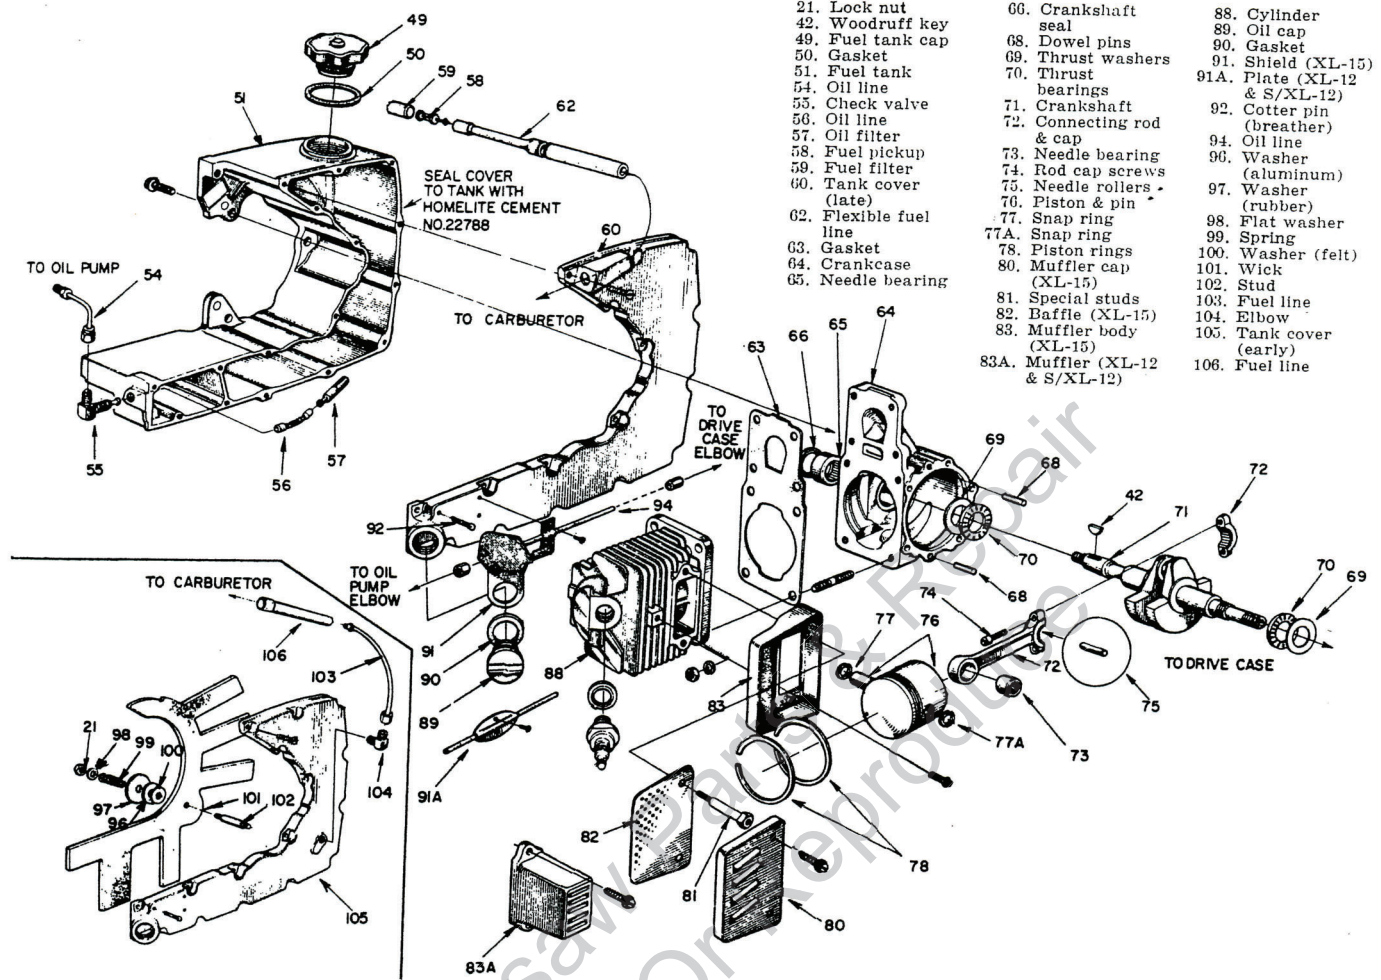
Exploded view showing powerhead and fuel tank construction of models XL-12, Super XL-12 and XL-15. refer to Fig. HL35A for other models. Early wick type fuel pickup and tank cover are shown in inset; beginning with serial No. 2188611, flexible hose (62) type pickup is used. Dowel pins (68) are used on later models; refer to text. Single piece muffler (83A) is used on XL-12 and Super XL-12; XL-15 is fitted with three piece muffler (80, 82 & 83).
